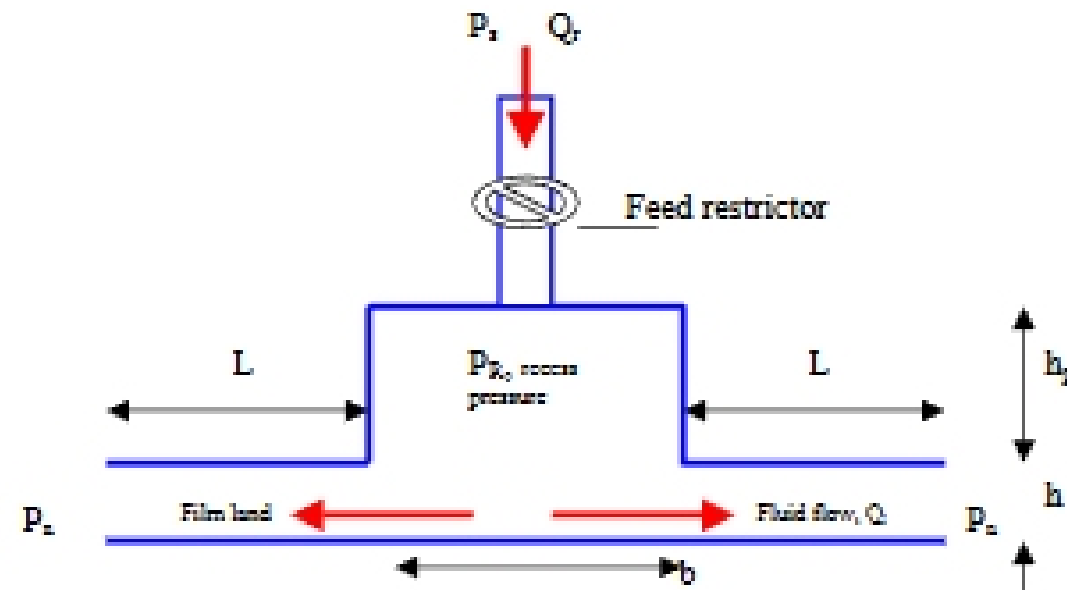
Geometry of a simple 1-D hydrostatic bearing
